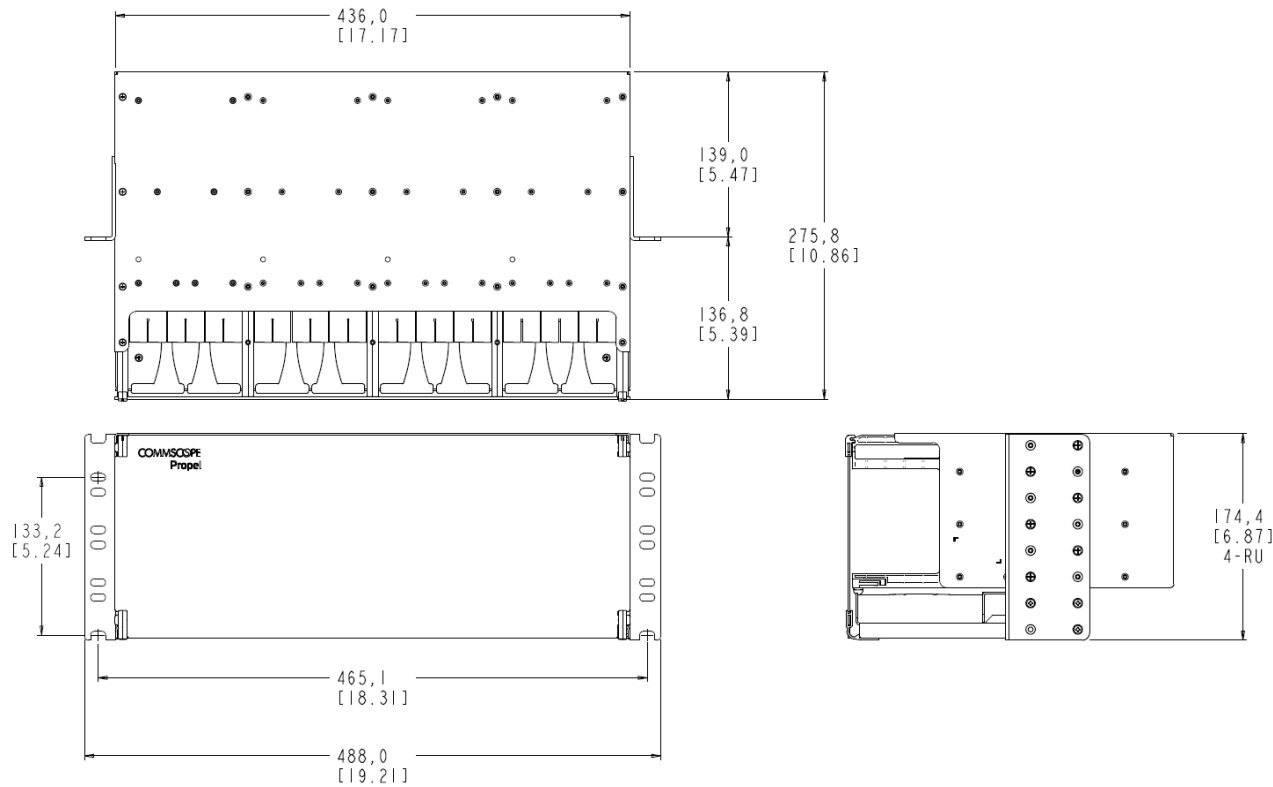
PPL-FA-4U-VCN Panel Dimensions
